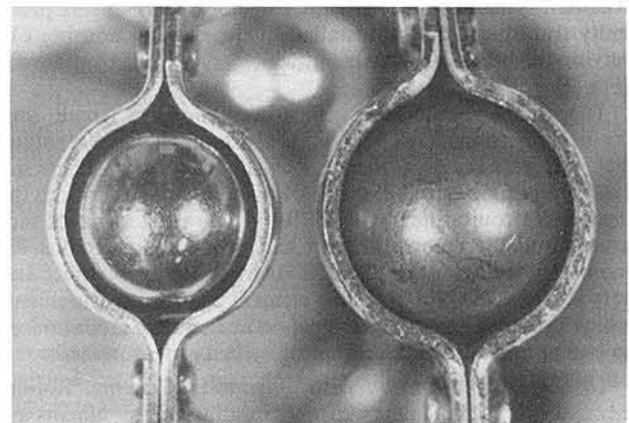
Closeup comparison view of nondrive-end bearing (left) rolling elements and cage to drive-end bearing (right) rolling elements and cage. Note damage on drive-end bearing rolling elements and cage.
